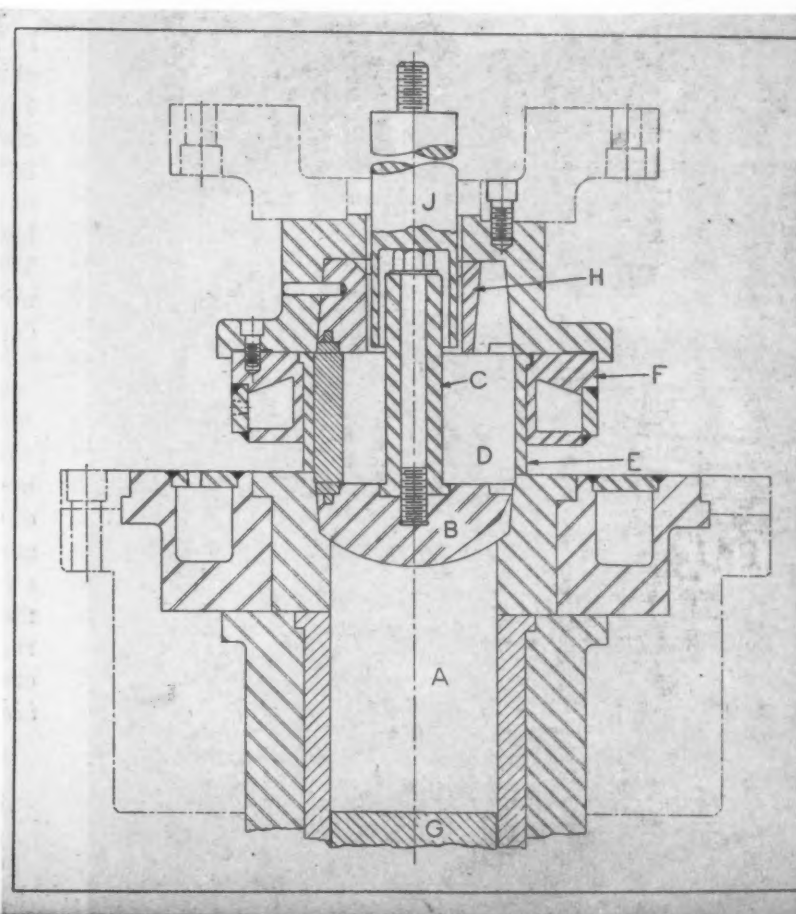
Cross-sectional View of Die Equipment Employed in Casting Aluminum on the Rotors to Fill the Lamination Slots and to Form End Plates and Fan Vanes on the Laminations
